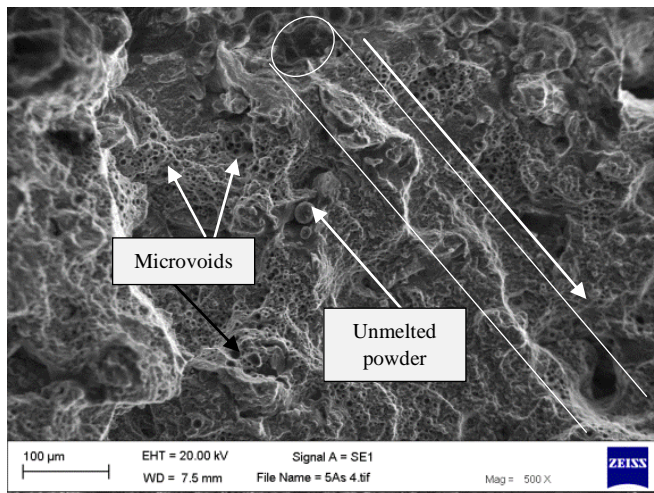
Fracture surface of 5-AS Al-MMC
